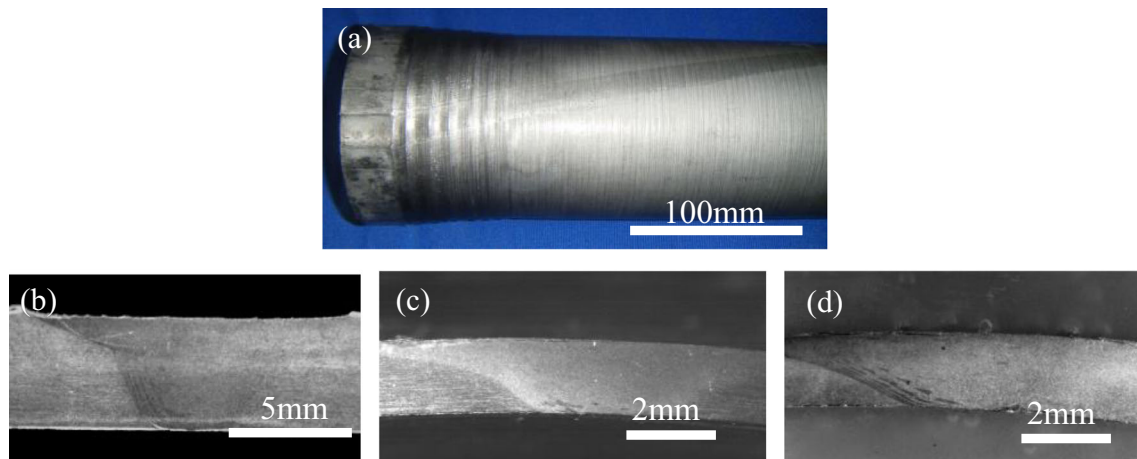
Friction stir welded tube: a as-formed tube, b cross section of the as-welded joint, c cross-section of the as-spun joint, and d cross section of the heat treatment joint
